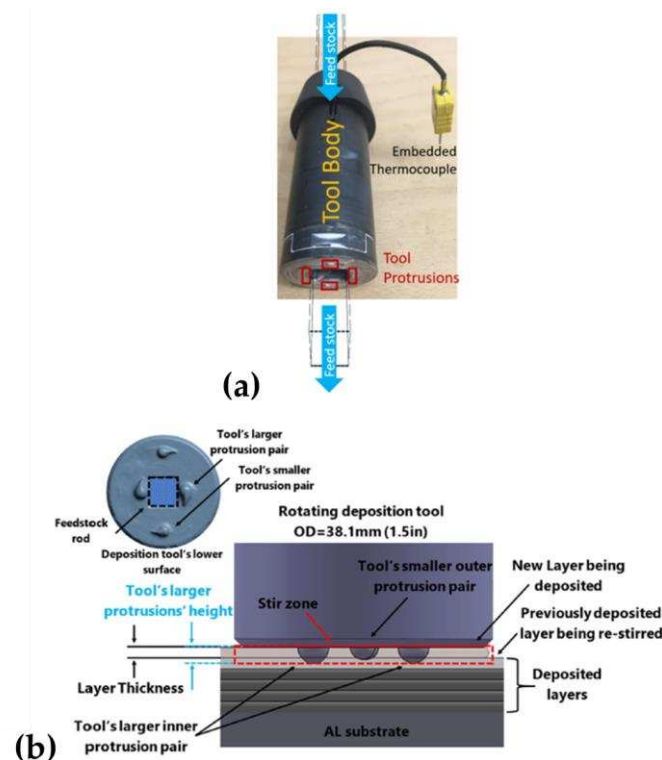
(a) Tool overview; (b) deposition tool schematics showing protrusion pairs [24].
